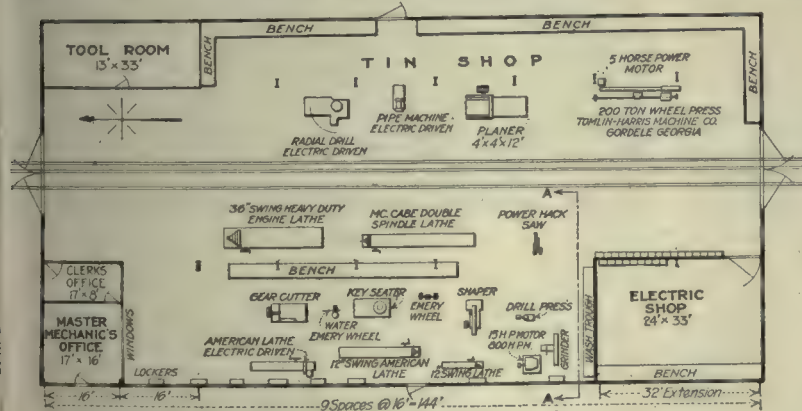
FLOOR PLAN OF MACHINE SHOP AND ARRANGEMENT OF TOOLS
